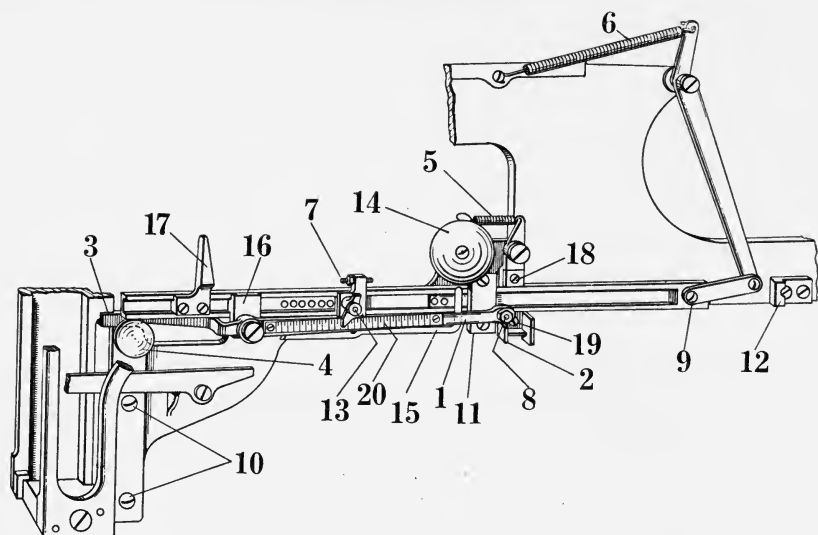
The First Style Assembler Slide rests within a recess provided in a supporting cast iron bracket, which is fastened to the face plate by dowels and the two screws 10 and 10. The slide is confined within the recess by right and left gibs, 11 and 16, which permit it to be moved freely lengthwise.
